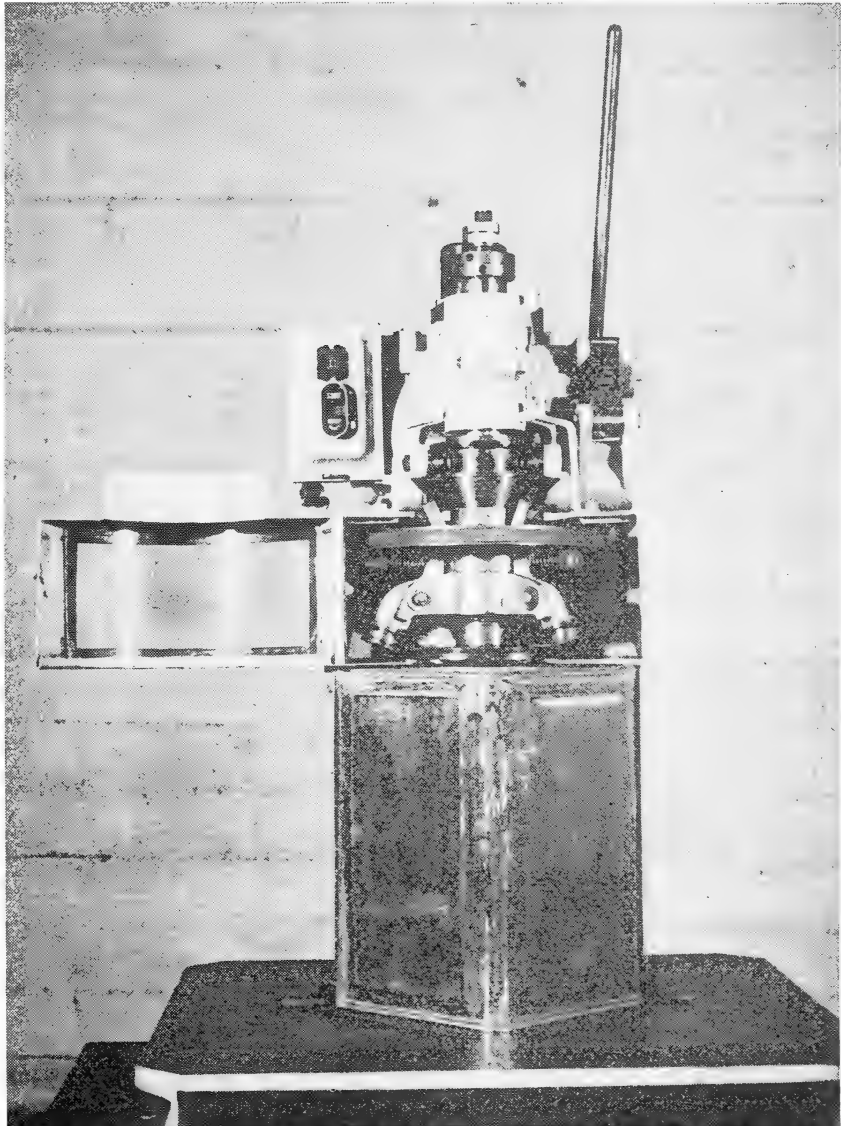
Sealing machine which forms a 20° angle, hermetic seal on cans.
